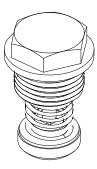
Valve Assembly (NOTE: There are two different valve plug designs)
